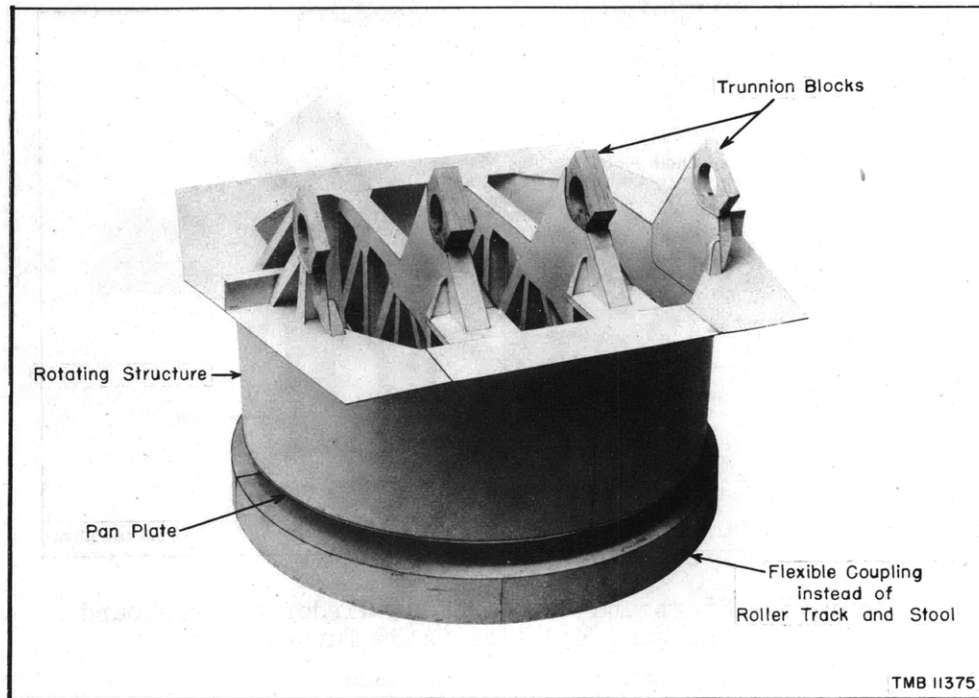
Assembly of Cardboard and Wood Model of CA139 Turret
